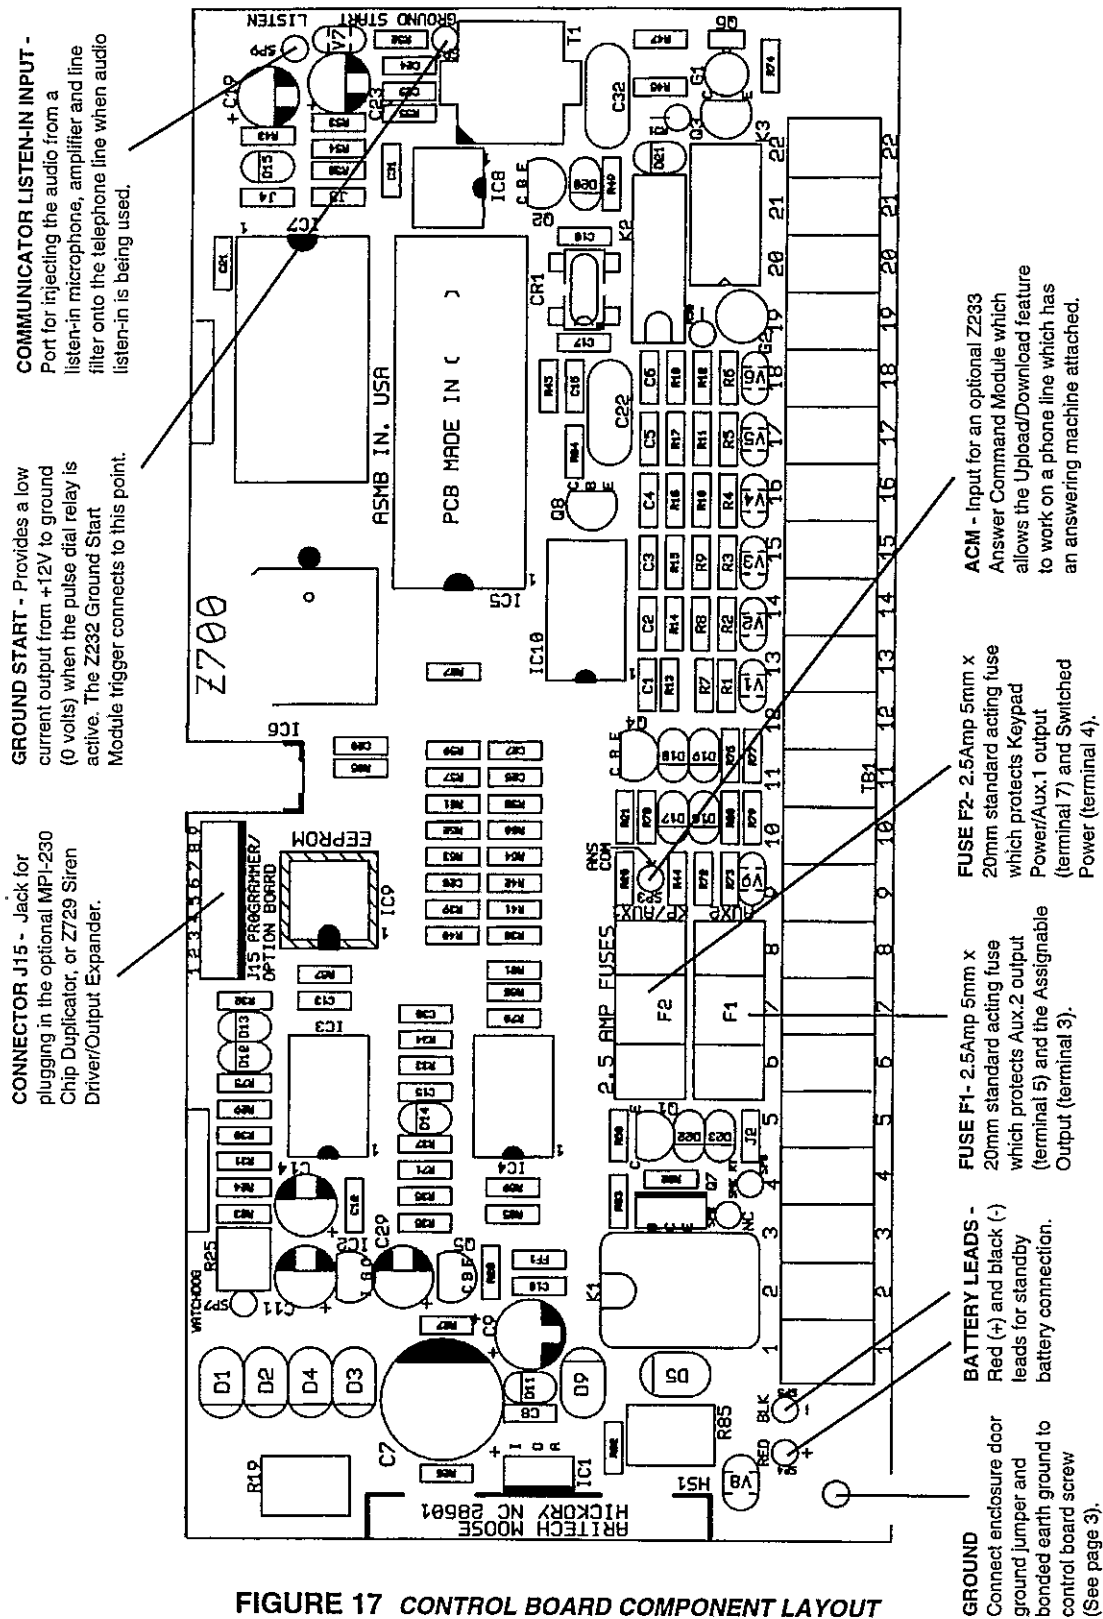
CONTROL BOARD COMPONENT LAYOUT
